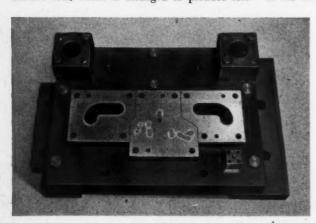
This tool completes the piercing operation on the engine bracket and blanks the two roller arms
